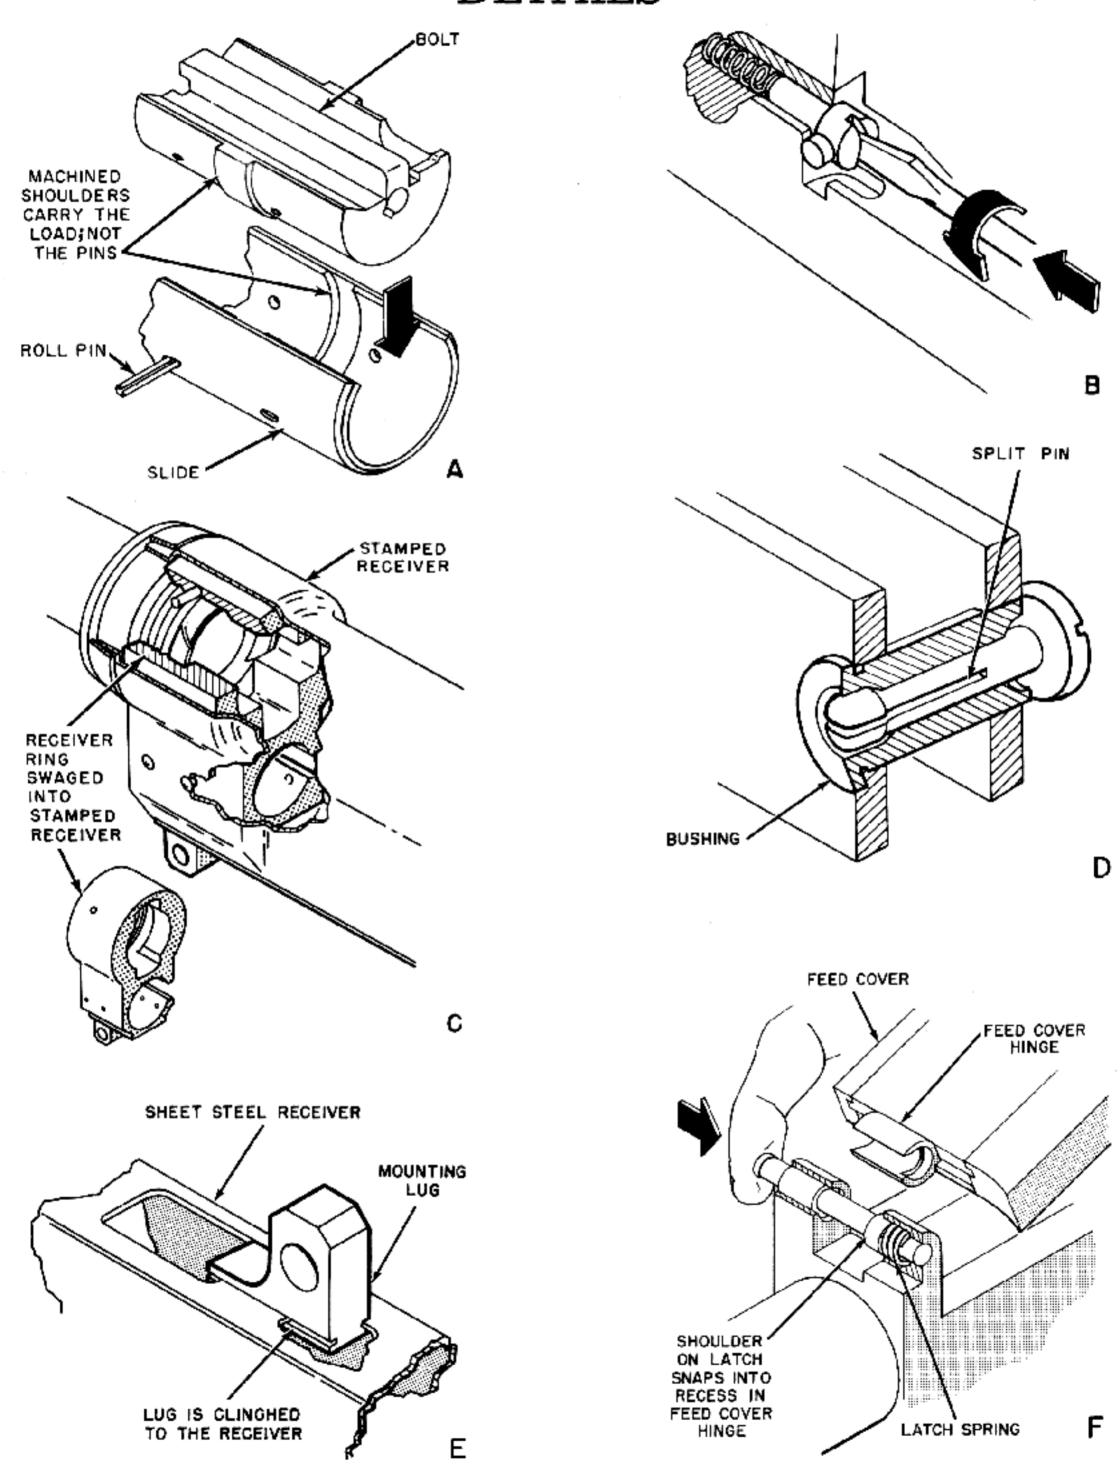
Methods of Attaching Machined Parts to Sheet Metal Receivers.
